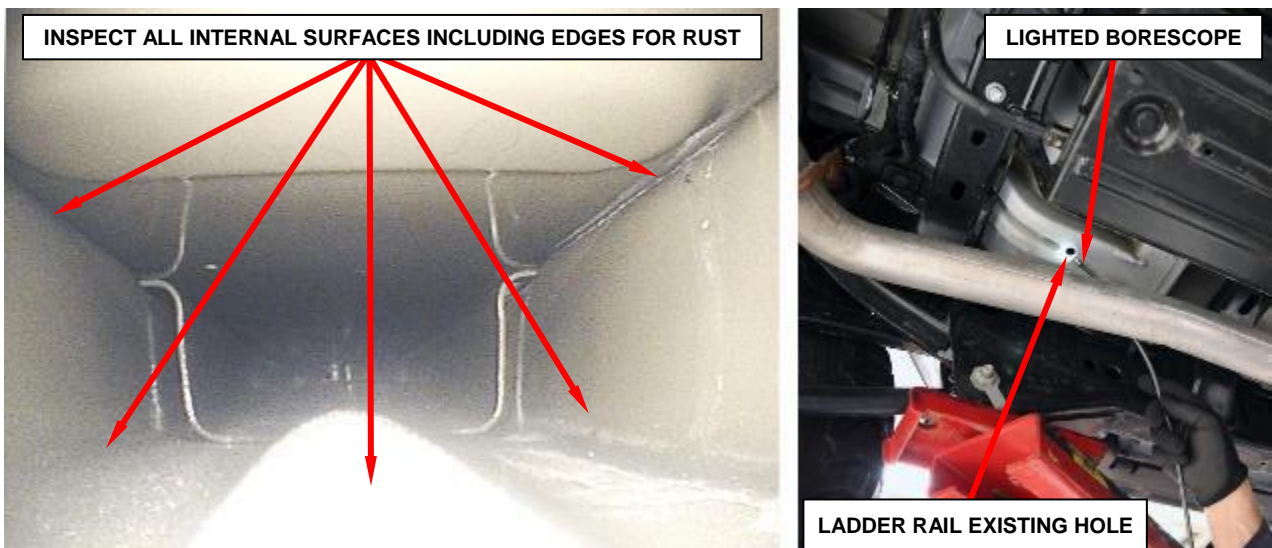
Inspect Ladder Rail Internal Surfaces and Edges for Rust
